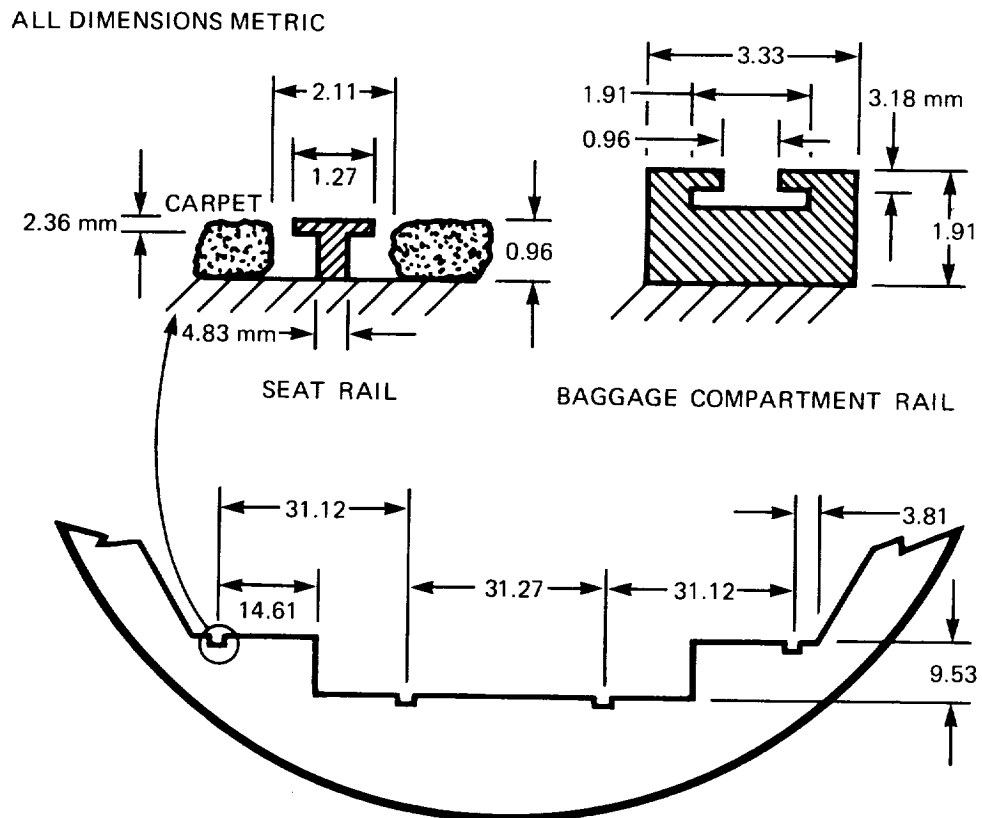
Seat Rail Spacing and Mounting Rail Cross-Sections
